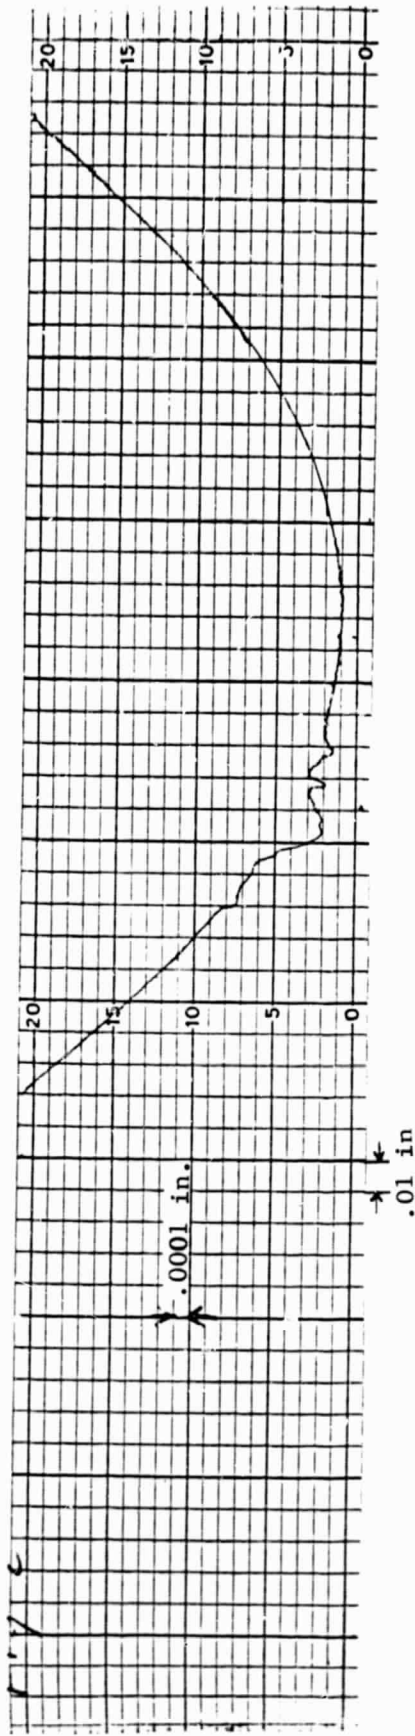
Talysurf Trace of the SOCKET Using the Straight Line Datum Attachment
